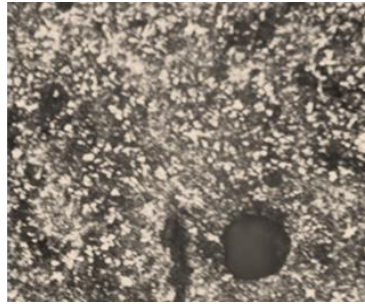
Macrograph of weld nugget of weld-bond inclusion due to present of adhesive (100X)
